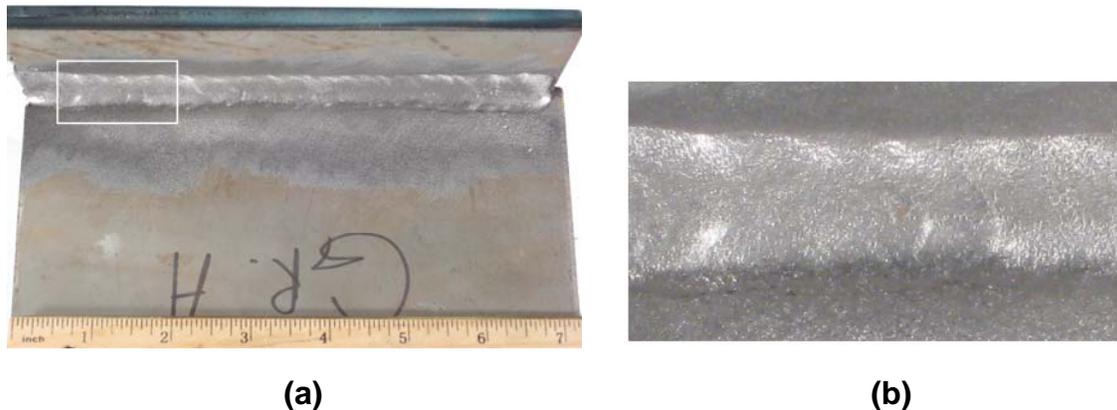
Weld bead cleaned via bristle blasting process for ABS-A plates joined at 90 degrees (a) overall view of cleaned weld bead and (b) inset view of cleaned weld pool segment.
